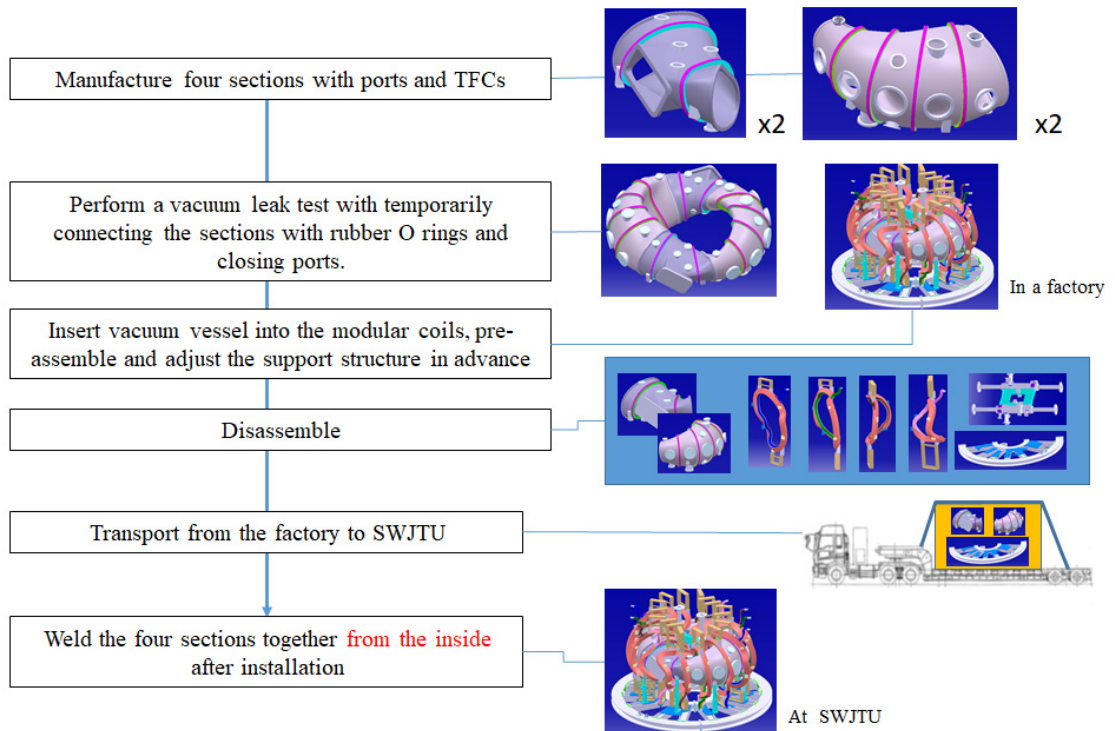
Procedure to assemble a vacuum vessel and 16 modular coils.
